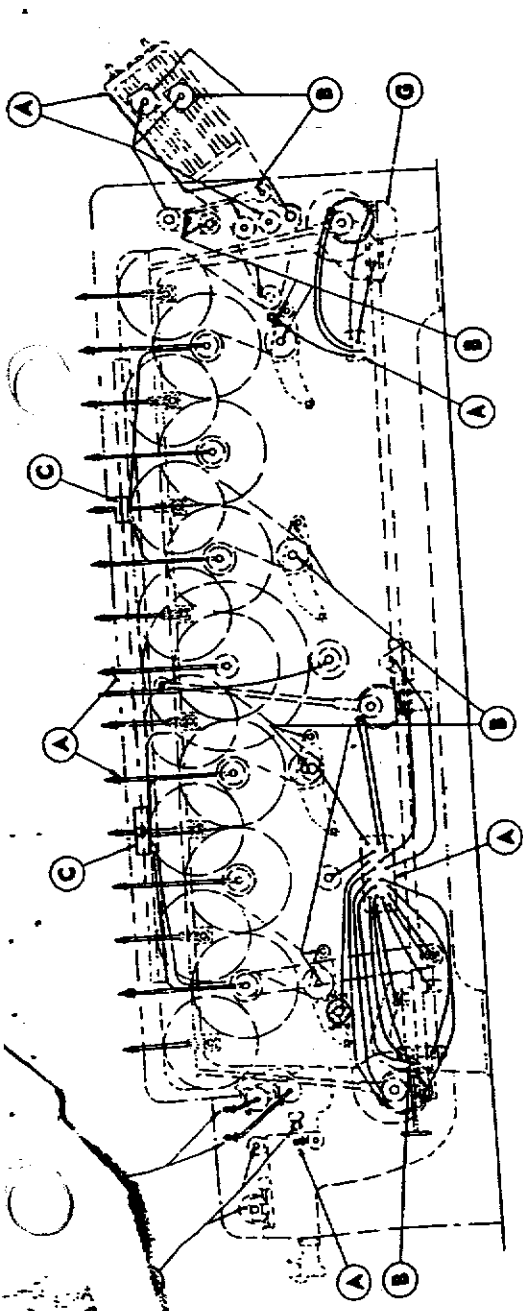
6-ROLL IRONER LUBRICATION DIAGRAM
